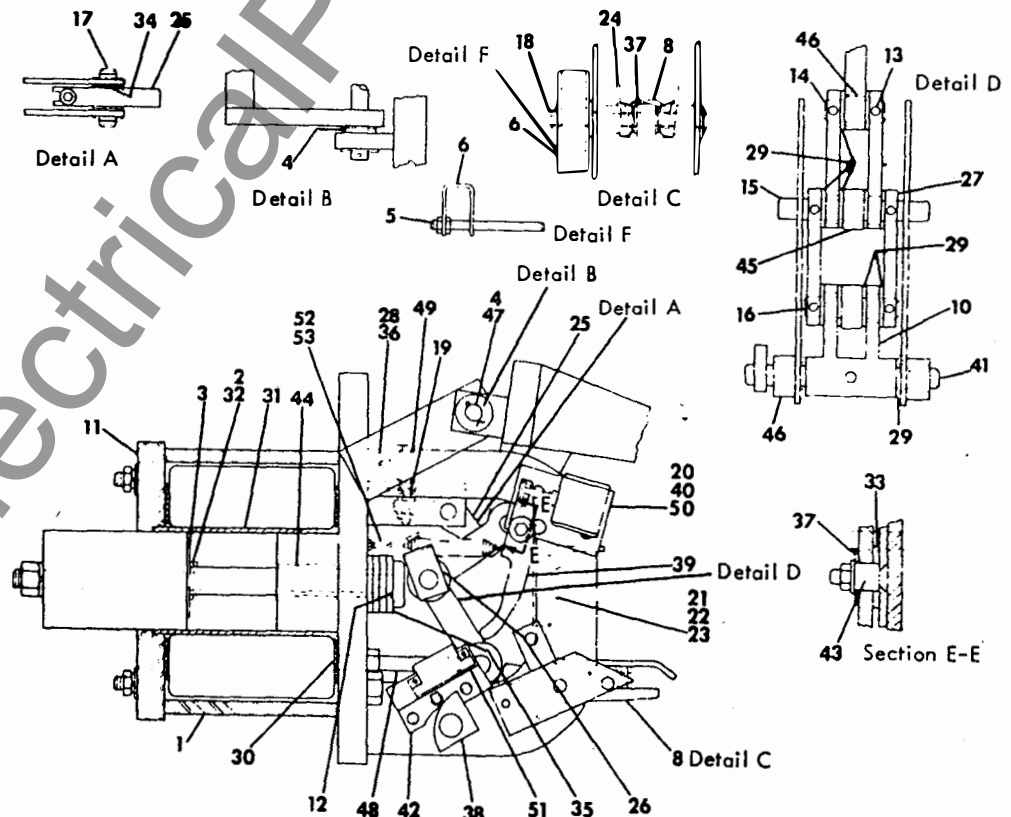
Type MA-75, MA-250, and MA-350 Solenoid Operator Assembly (Codes A through H; See Code Table, page ii)
